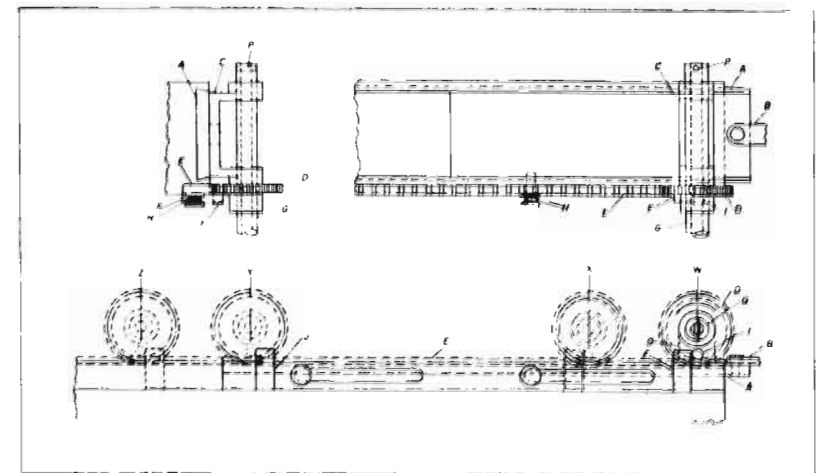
Mechanism devised for actuating intermittent rotary and linear movements.
